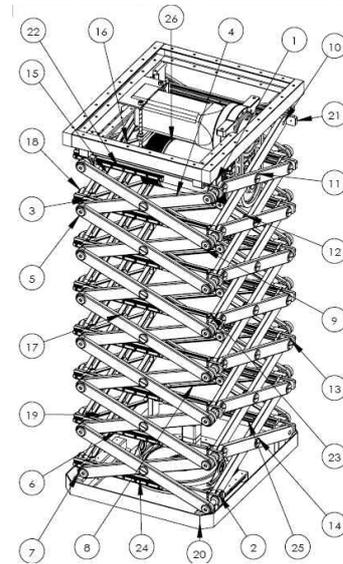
The draft of the vertical moving device using a double scissor mechanism
